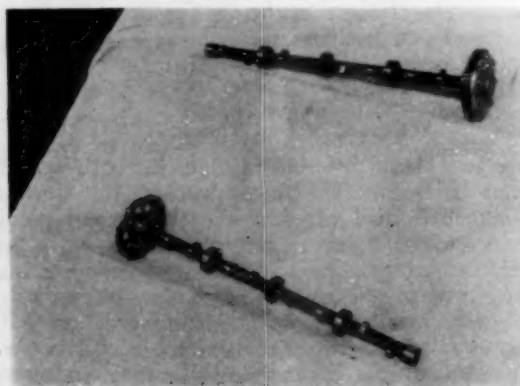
Cam Shafts Ready for Assembling in an Aircraft Engine.
